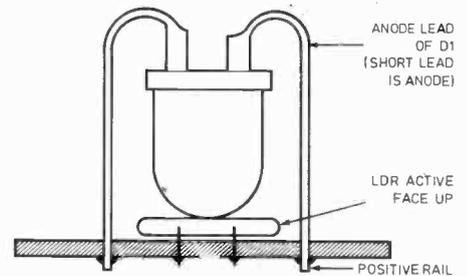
Component layout and mounting details for D1 and R12 shown above
